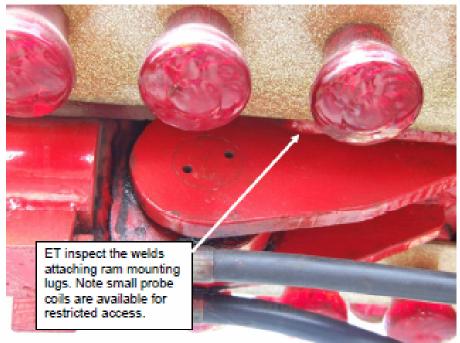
Attachment welds retaining the hydraulic ram on the arms.
